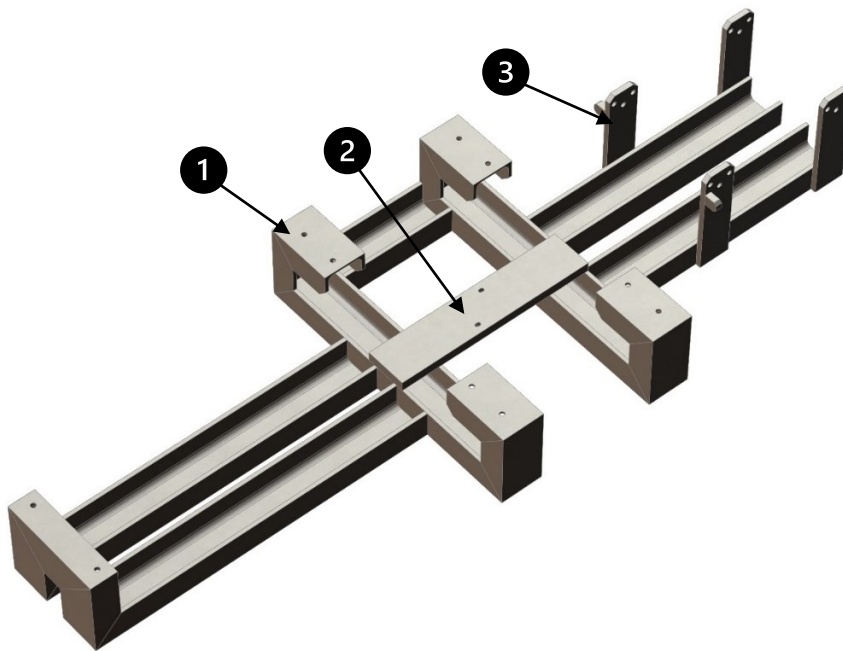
Reinforcing frame section. (1) UPE80 beam. (2) Fixture compensator mount. (3) Unloading unit brackets.
